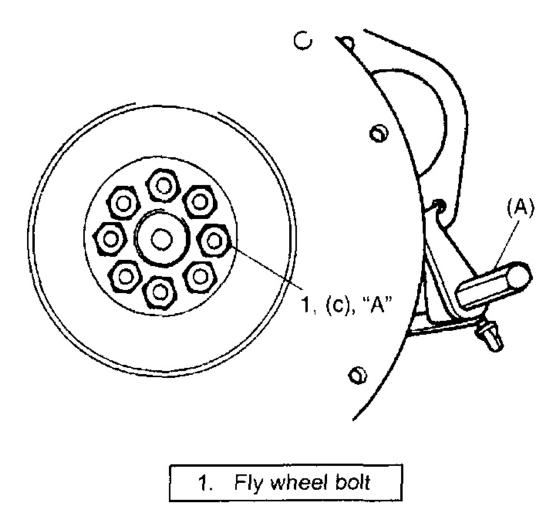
Installing Flywheel (M/T) Or Drive Plate (A/T) Courtesy of SUZUKI OF AMERICA CORP.
